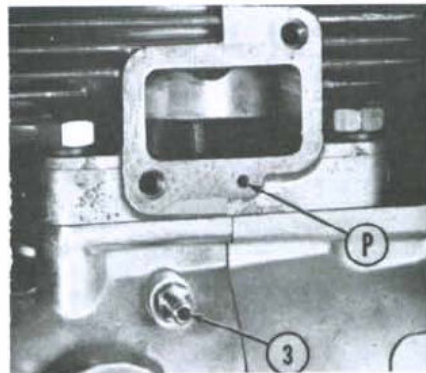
Intake port of cylinder with adapter flange removed, showing the drilled pulse passage (P). Refer to Figs. 1 & 2 for assembled options.
